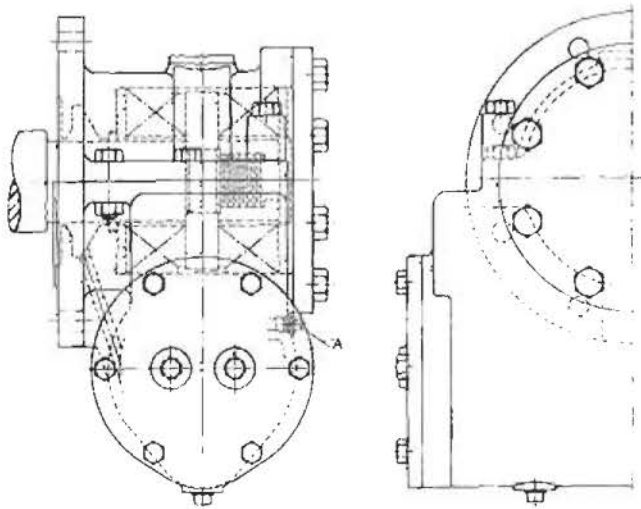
Self-contained mounting for double Kingsbury Thrust Bearing with automatic lubrication. End flange is provided for attachment to radial bearing housing.
